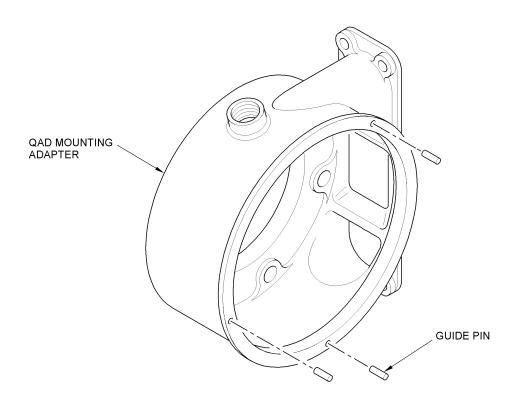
Repair of the Mounting Adapter Guide Pin
